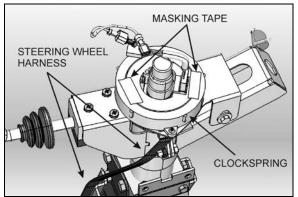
LOCKING THE CLOCKSPRING IN PLACE
